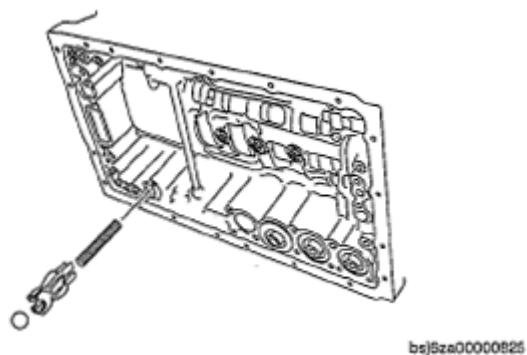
Identifying Check Valve Subcomponent And Compression Spring
